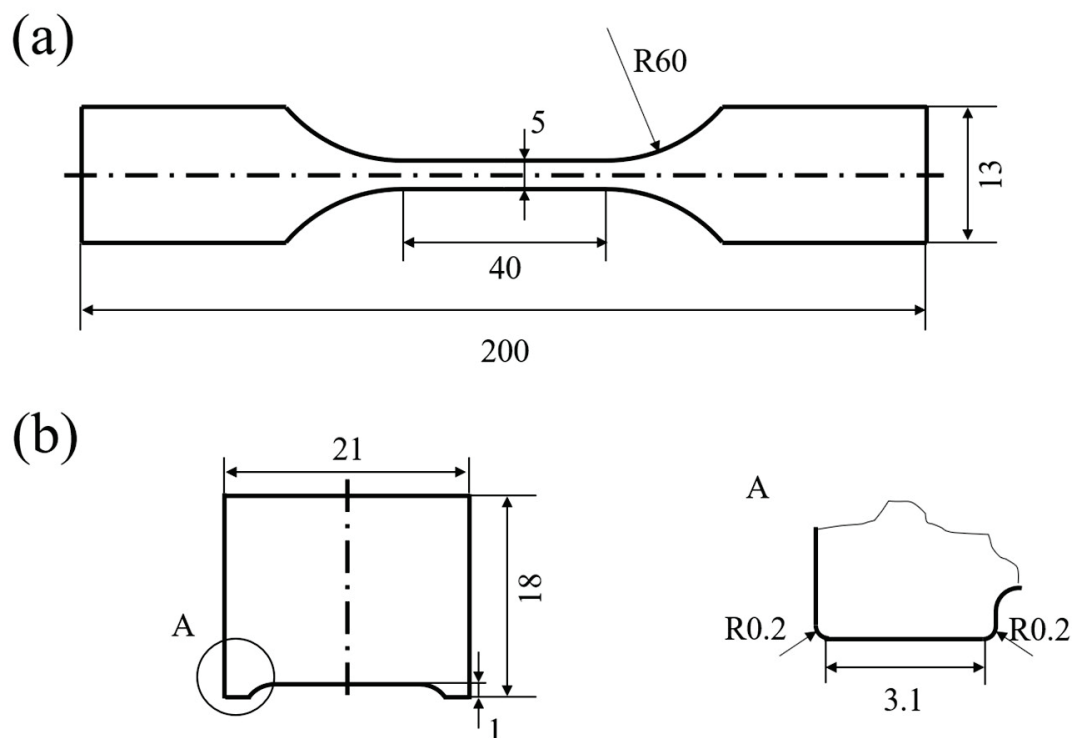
Dimensions of the (a) specimen and (b) fretting pad (all dimensions are in mm).
